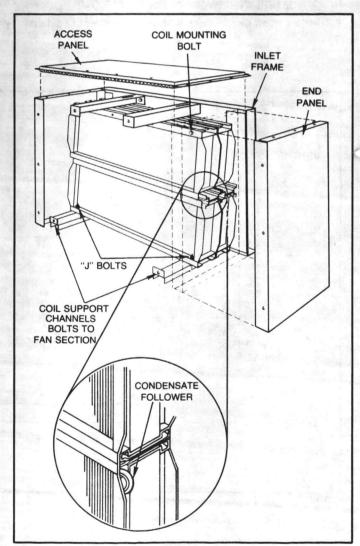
B - Draw-Thru Unit Coil Section Details with View of Condensate Follower
